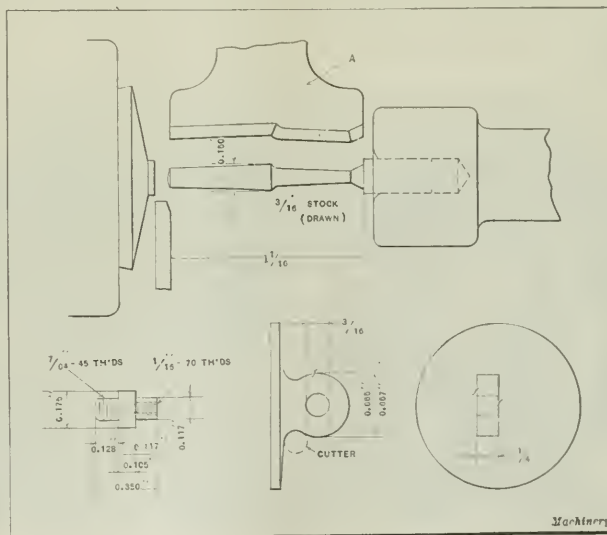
(Above) Diagrammatic Tooling Lay-out for making Taper Points for Dial Gages: (Below) Two Examples of Work machined with Bench Equipment
